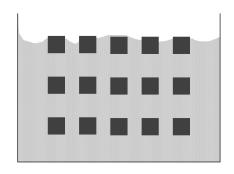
MJF Printed Parts Suspended in Unfused Powder After Initial Vacuum
